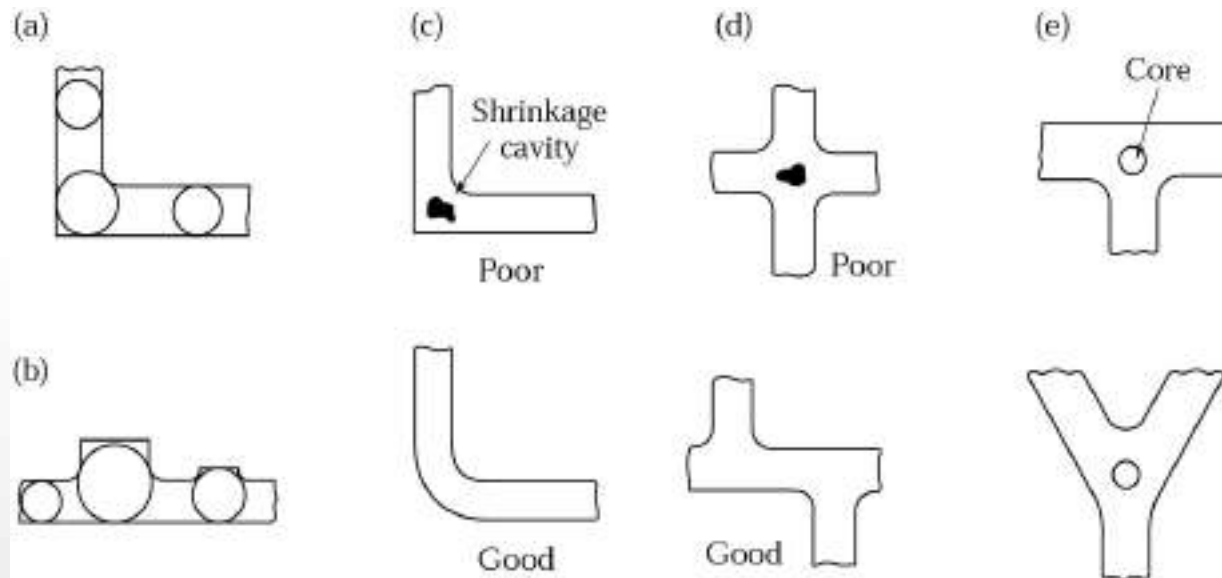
Examples of designs showing the importance of maintaining uniform cross-sections in castings to avoid hot spots and shrinkage cavities.
